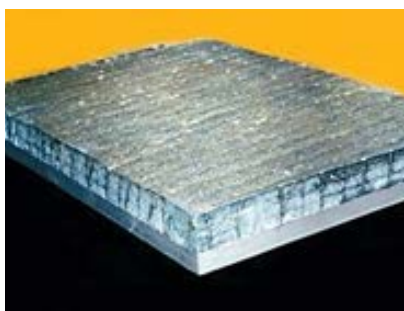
Cracks in the work surface of abrasion-resisting plates hard surfaced using high-chromium cast iron of group Fe14 and a self-shielded flux-cored wire (process 114) [2]
